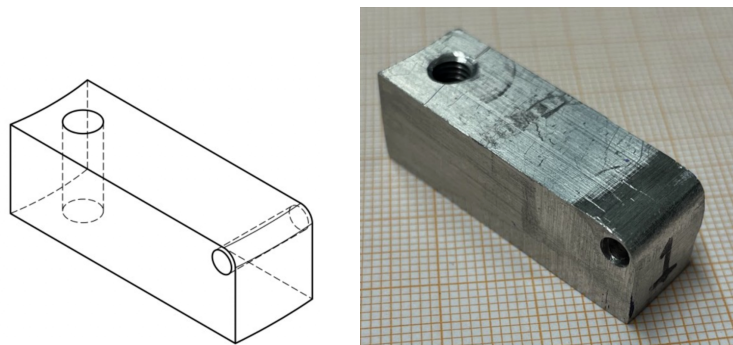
CAD Drawing (left) and as constructed (right) flap pusher arm
